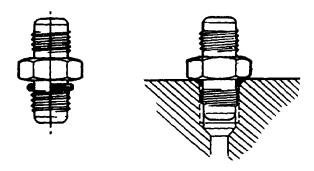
Non-Positioning Type, Straight Threaded Fittings
